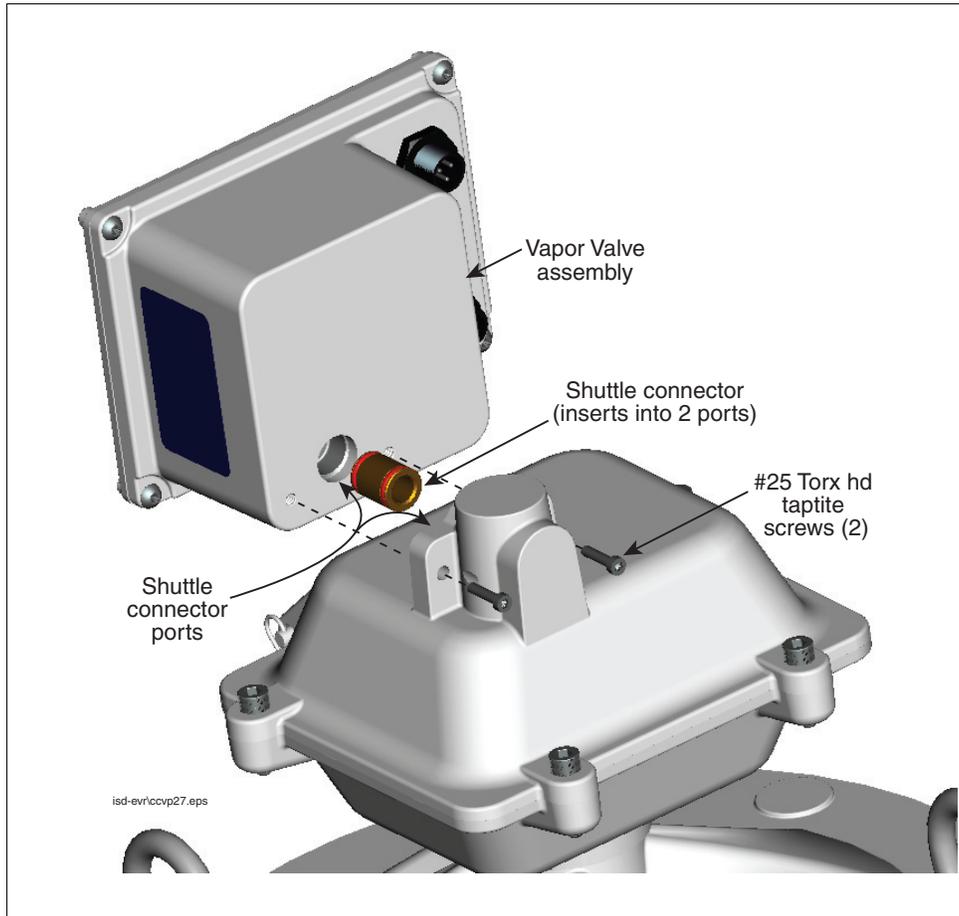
Replacing Vapor Valve assembly and Shuttle Connector
